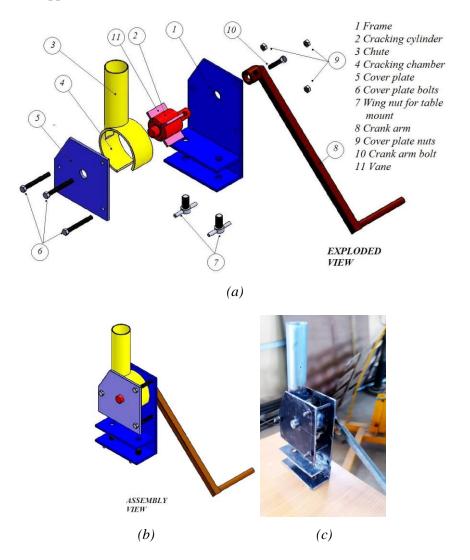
SolidWorks rendering of (a) the exploded view showing the components, (b) when assembled and (c) pictorial view of the completed machine
